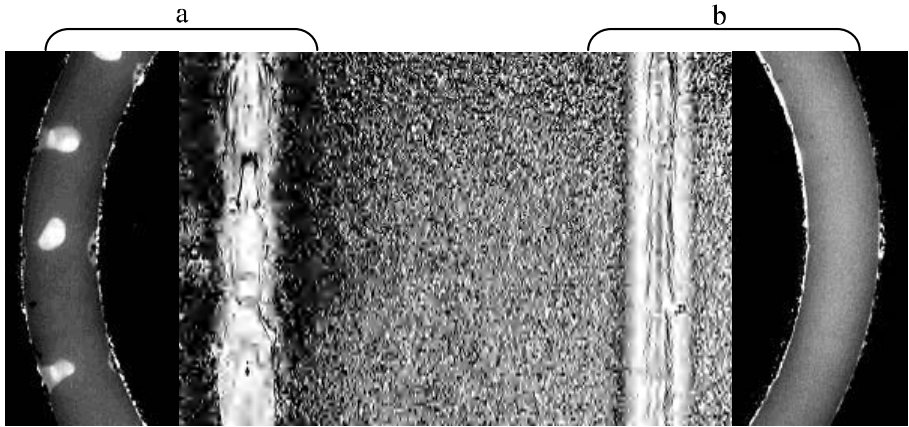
Surface aspect and X-ray on a section of EB welds of XC 38 ($Al = 0.002\%$): a) without insertion; b) with insertion in the mating plane of an aluminum foil 0.02 mm thick
